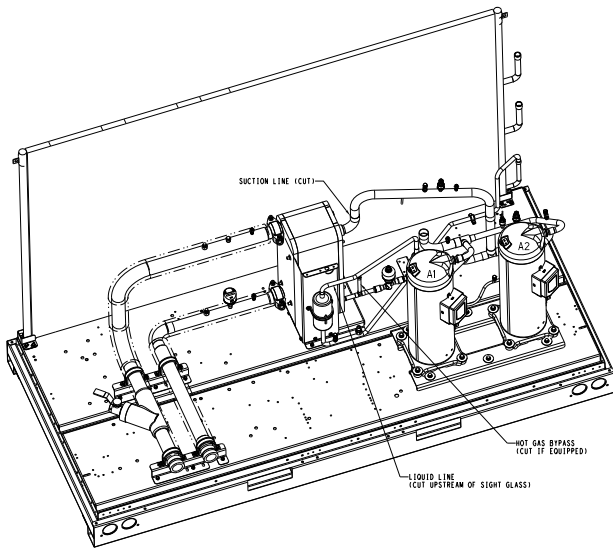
30RC010-030 Typical Unit Evaporator Piping (30RC020 Shown)
